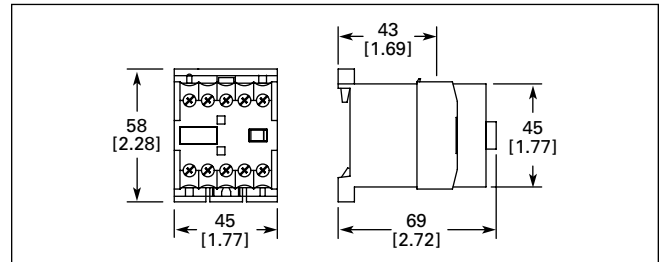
XTMCXTSA Mini Sealable Shroud — Approximate Dimensions in mm [in]
